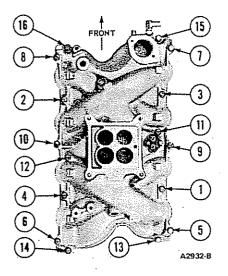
A Intake Manifold Torque Sequence 460 Engine
